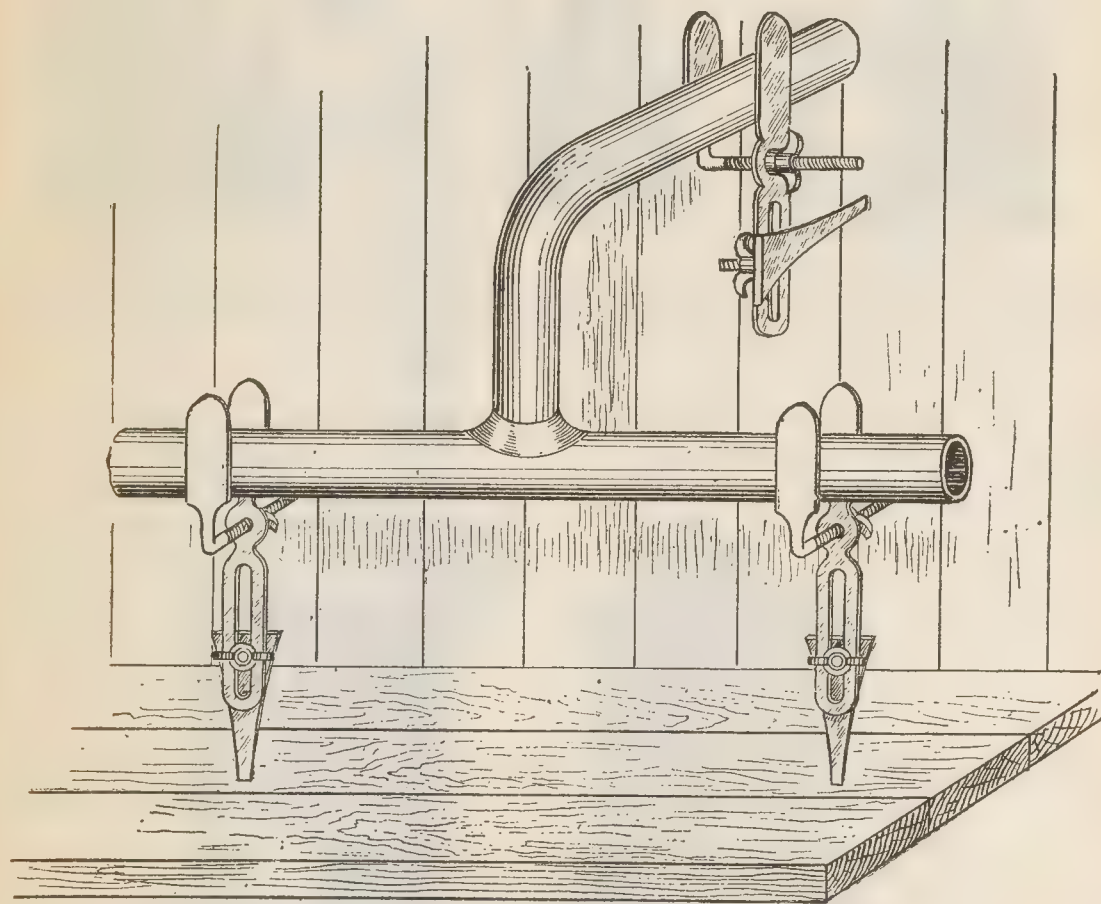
,348.—Starbuck adjustable pipe holders for holding lead pipe in all positions while making wiped joints.
